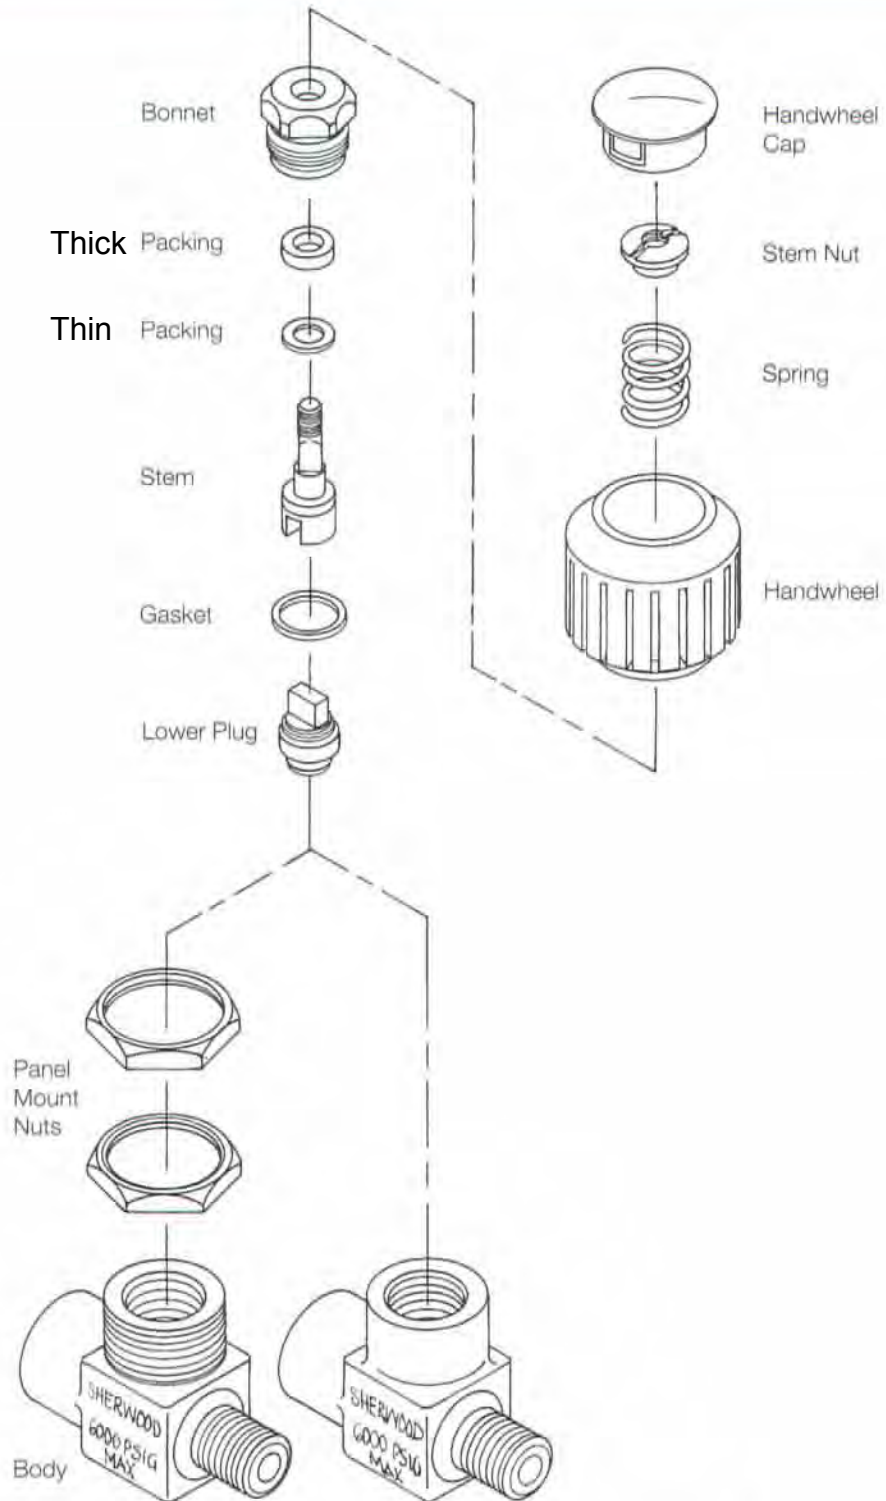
“YVA” SERIES LINE VALVE ASSEMBLY
